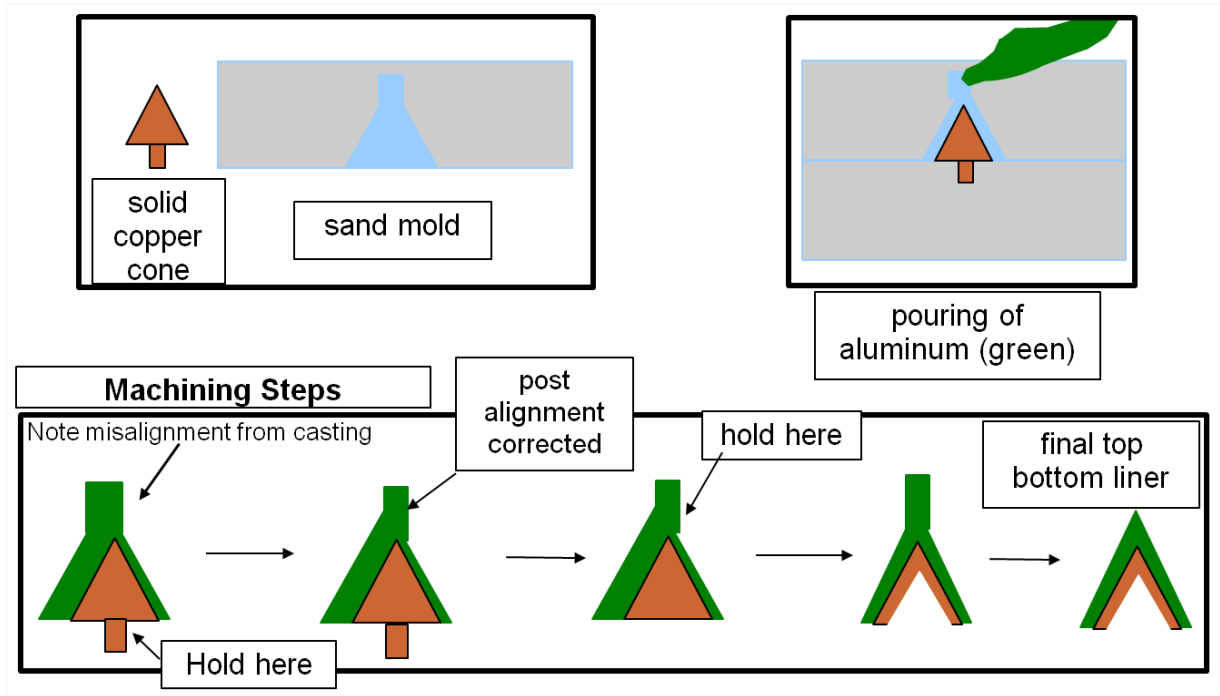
Steps of pouring aluminum around a copper piece, then machining to correct misalignments and produce a top bottom liner
